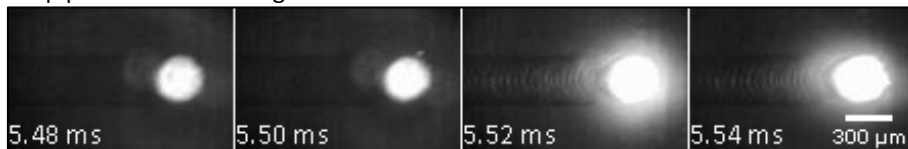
Sequence of coaxial high-speed images of a welding process transferring from heat conduction welding to deep-penetration welding.
